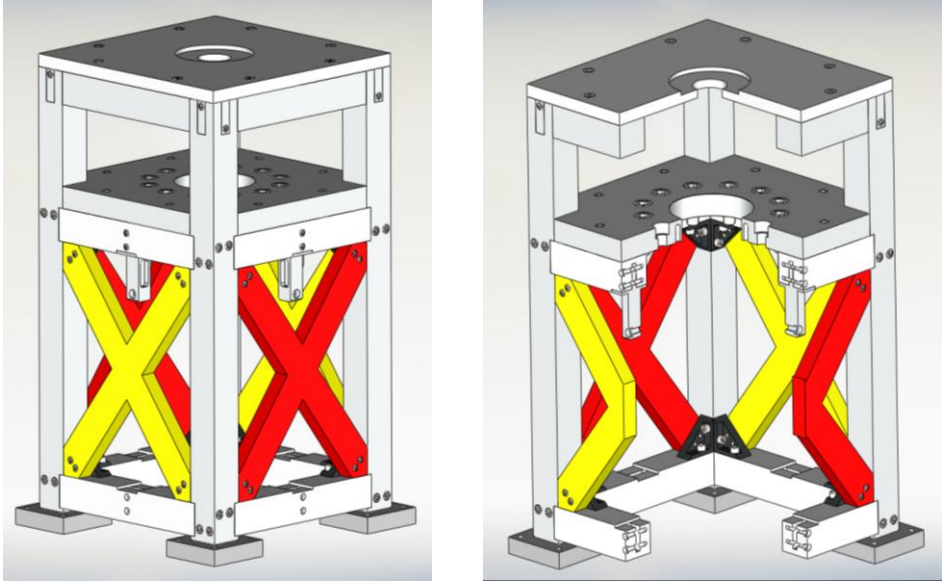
Test rig structure isometric view (left) and section cut view (right)
